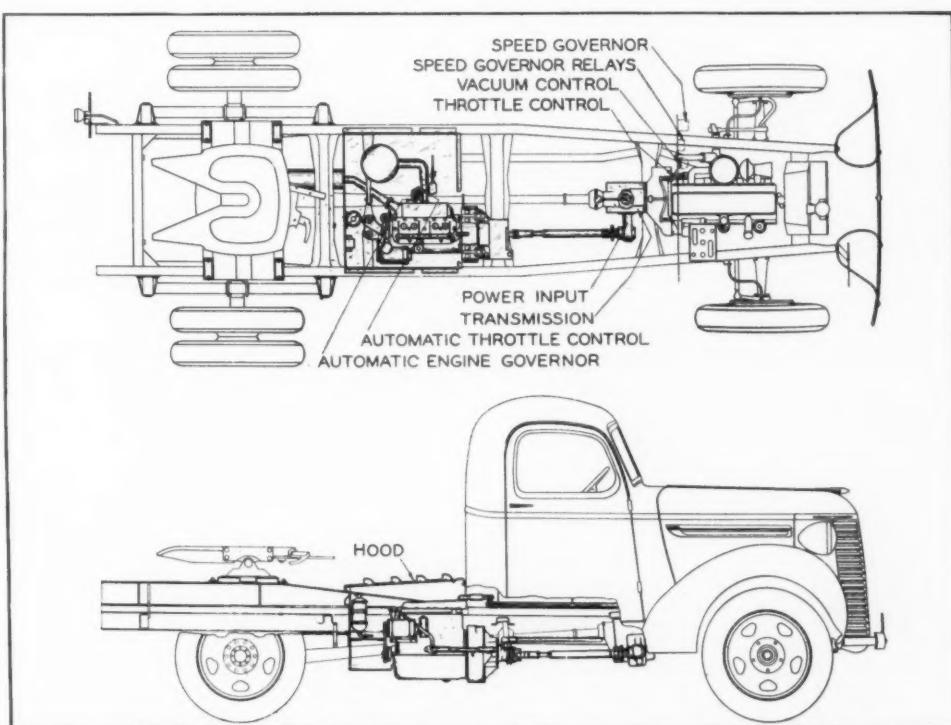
CHEVROLET TRUCK EQUIPPED WITH CLARK BOOSTER UNIT UTILIZING HERCULES ENGINE
